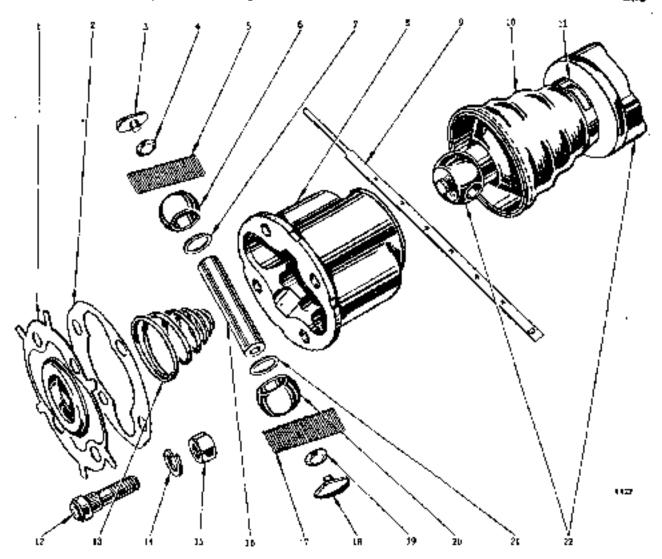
Propeller Shaft and Universal Joints (Disassembled) (Bull and Trunnian Type) (1934-42 Models)
